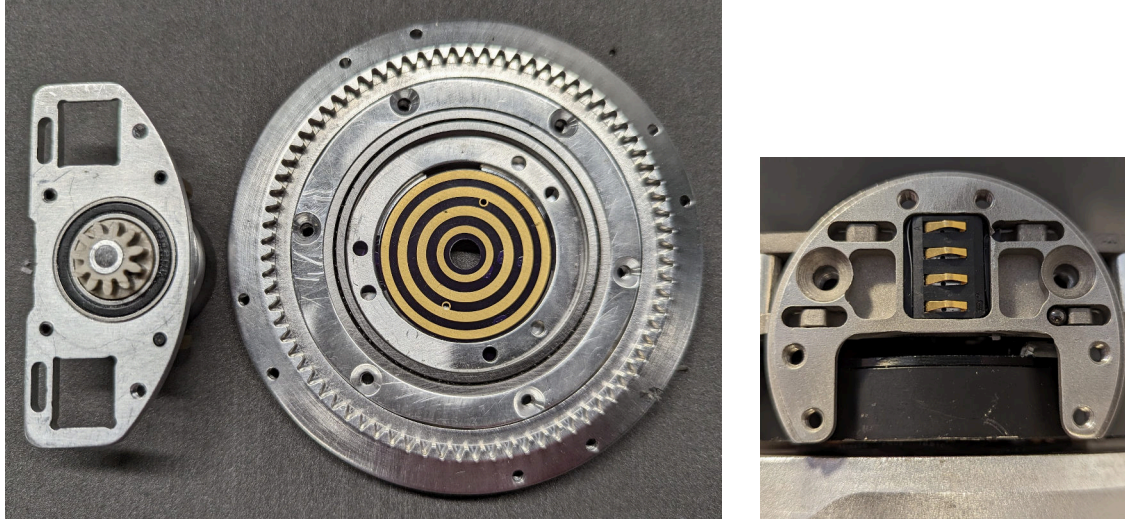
Image of the custom machined gearing and slip-ring system for the Belty’s axis C rotating foot. This design uses the a 11-tooth spur gear machined out of PEEK to drive a 77-tooth internal gear which is directly machined into the output foot’s frame. A custom four wire slip-ring is implemented using a PCB matched with an electrical spring contact in order to pass power and CAN bus signals through to the rotating foot connector.
